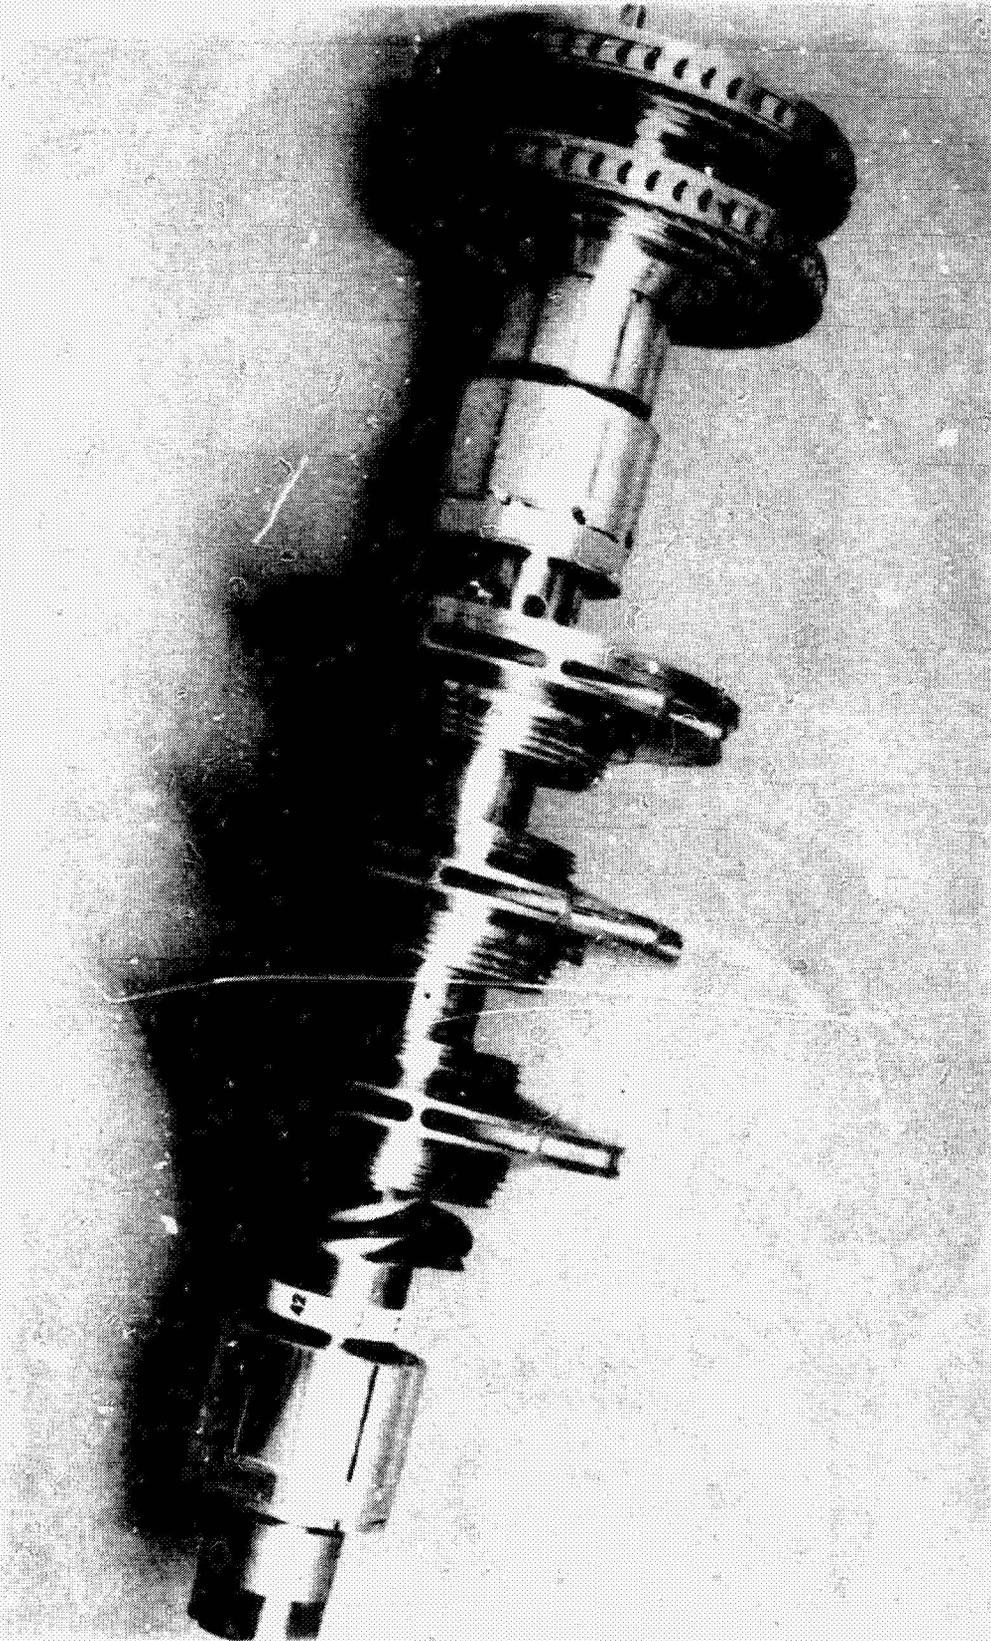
Mark 48-F Turbopump Rotor Assembly with Hybrid Bearings
